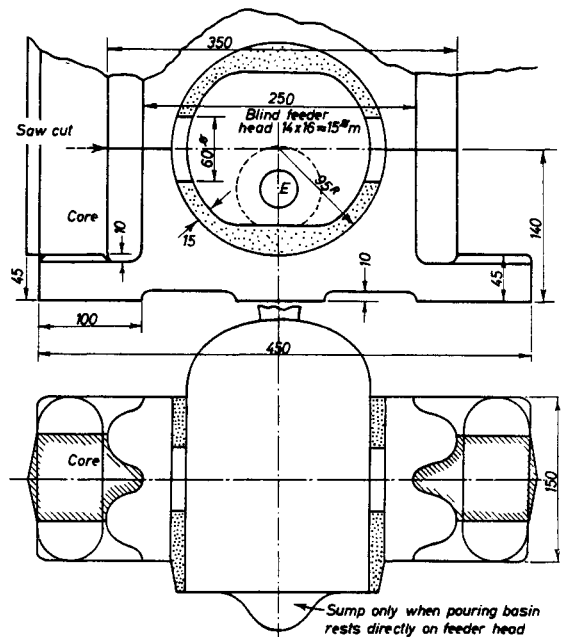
Bearing block. 2nd alternative: each of two bearing blocks moulded together on the flat, fed with tubular internal feeder (cf. Chap. 7).
